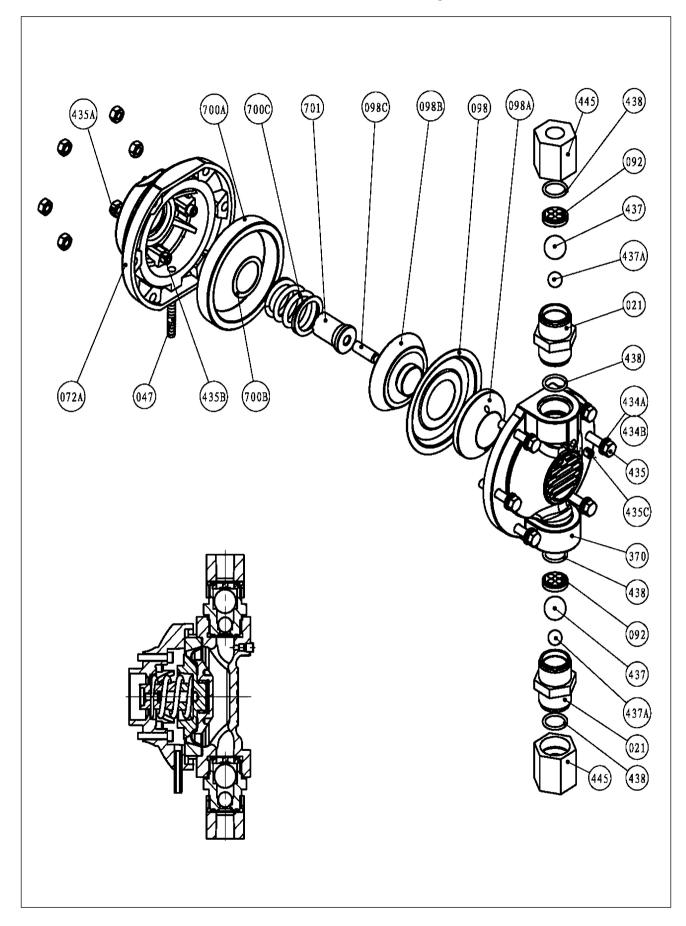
GM0090~GM0500 STAINLESS STEEL & SLURRY LIQUID END
